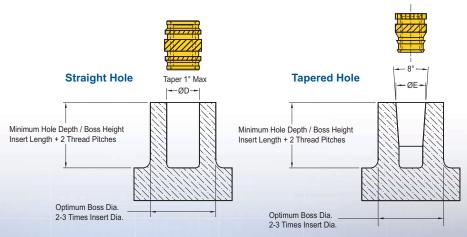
MOLDED HOLES ARE PREFERABLE TO DRILLED HOLES BECAUSE OF THE STRONG, DENSER SURFACE OF THE MOLDED HOLE. FOR STRAIGHT HOLES, THE TAPER SHOULD NOT EXCEED A 1° INCLUDED ANGLE, AND TAPERED HOLES SHOULD HAVE AN 8° INCLUDED ANGLE.
